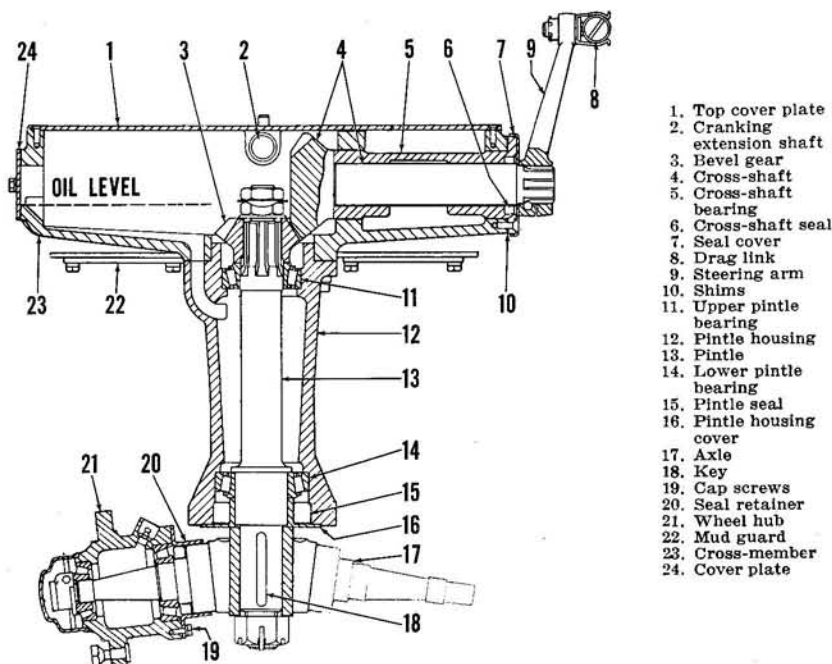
Drawing showing cross-sectional view of tricycle front pedestal (cross-member and pintle). Oil level is checked by removing plate (24). Wheel bearing detail is similar to that shown for adjustable front axle in Fig. 1, except that seal retainer (20) is secured to inner side of hub (21) by cap screws (19).
